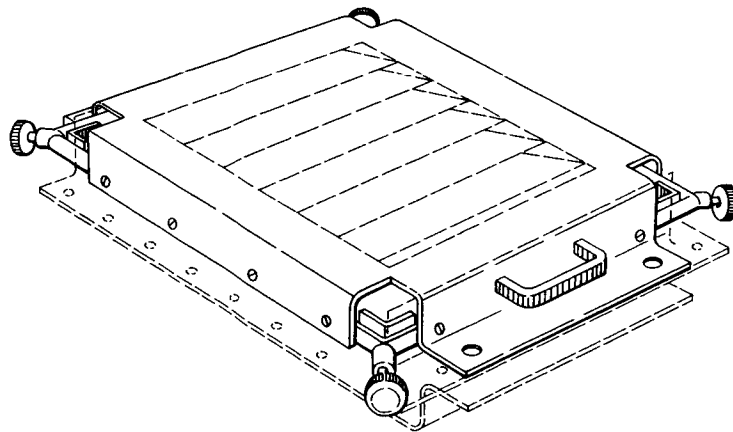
Assembly and Handling Fixture, Spacecraft Louvers
